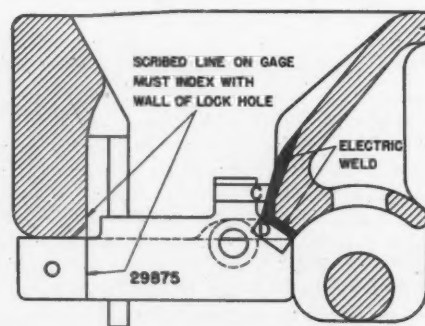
Rear wall of the lock hole and secondary anti-creep shoulder corrected by electric welding to meet requirements of gage No. 29875
